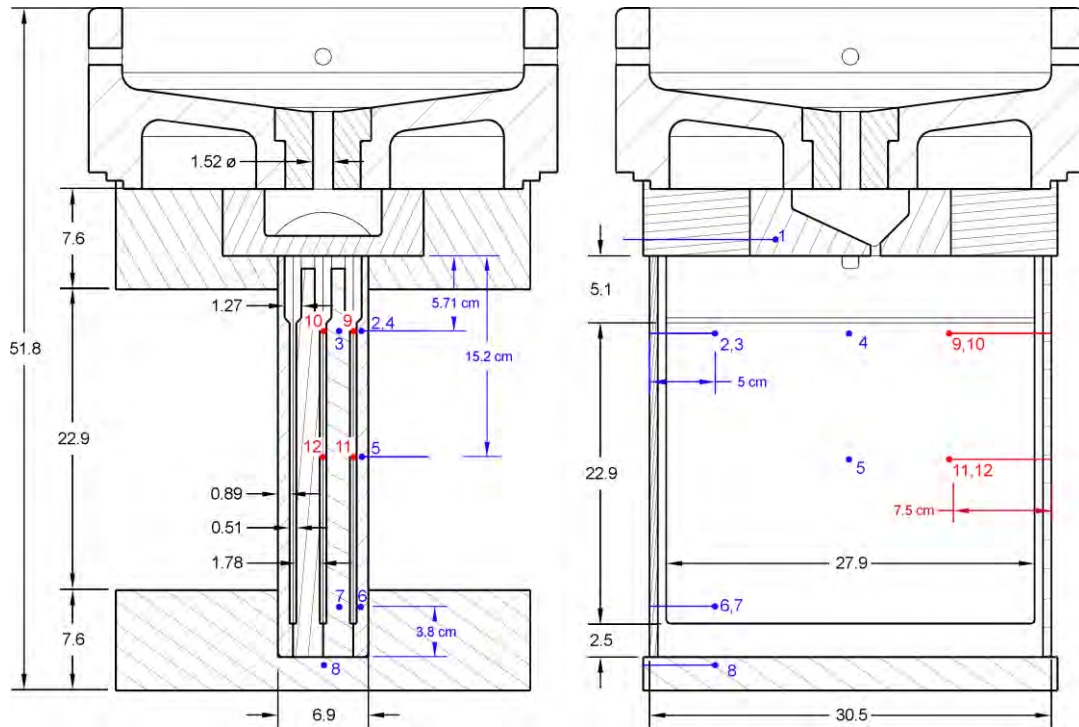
Front and side views of the revised mold design with the linear distributor along with the location of thermocouples. Dimensions are in centimeters.
